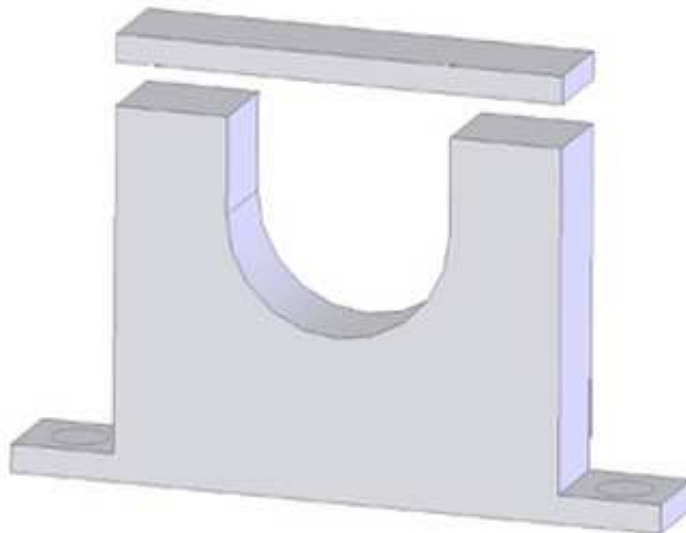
Support apparatus for the roller for embedded bearing of the rollers. Dimensions are shown on technical drawings and given in appendix B with Part number 8
